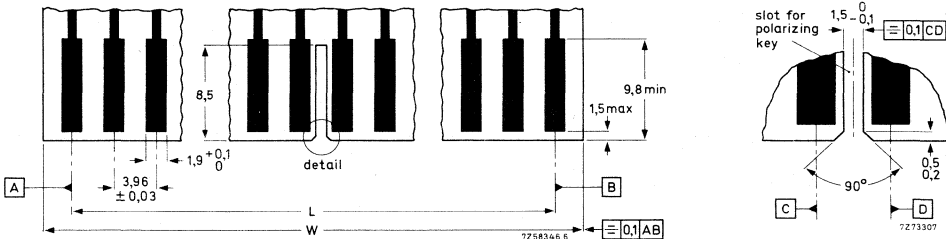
Recommended dimensions of the printed-wiring board; see Table 4 for dimensions L and W.
